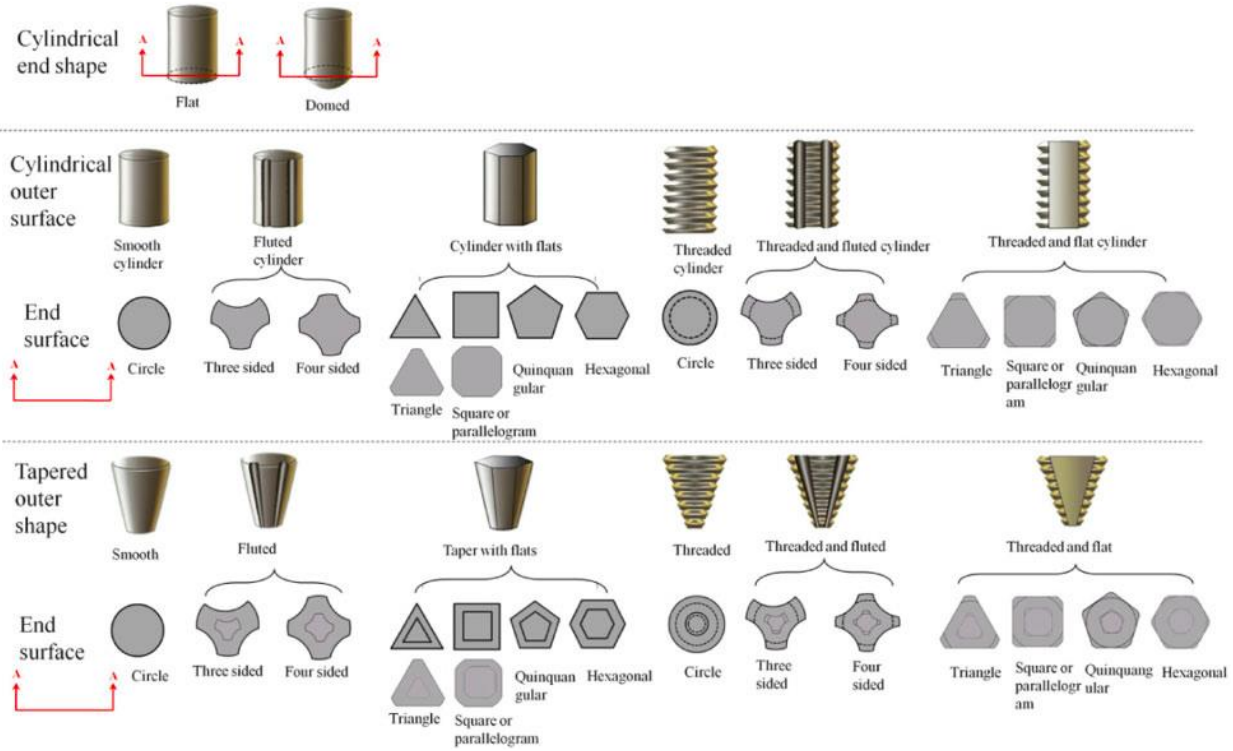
Different probe shapes for friction stir welding. ([Zhang et al., 2012](#))
